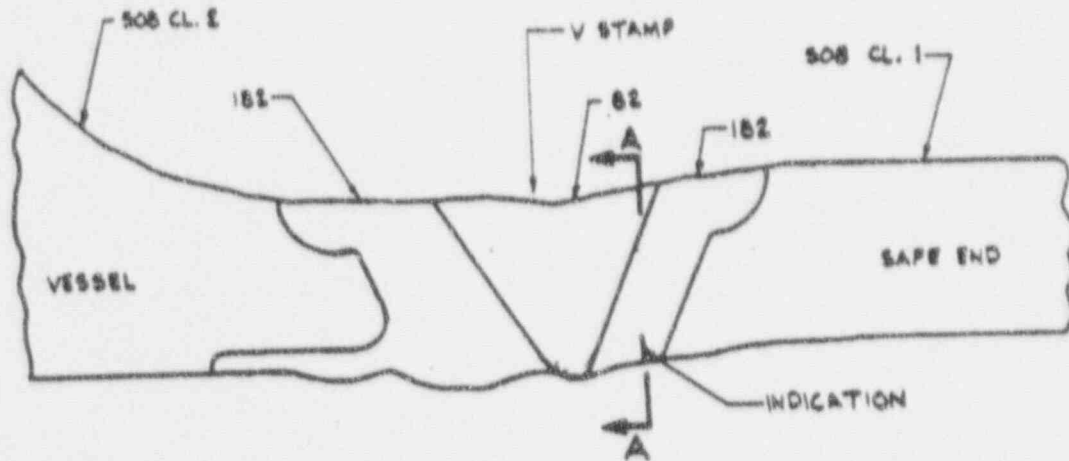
N4A weld Geometry and 1989 UT Indication Sizing
